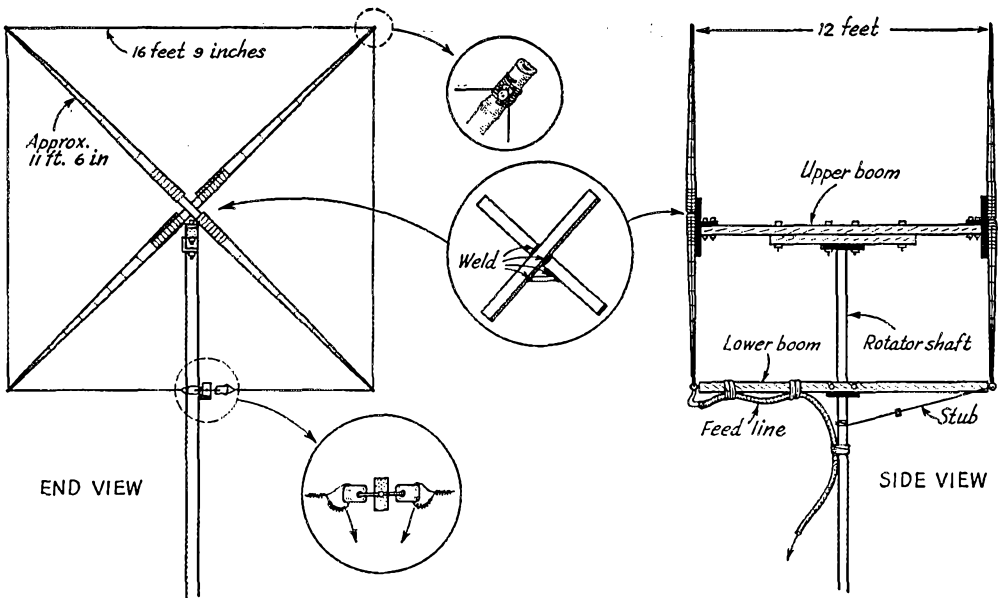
End and side views of 20-meter quad. Upper insert shows method of fastening antenna wire to support arms. Center insert shows construction of support-arm mounting bracket. Lower insert shows method of attaching feed line and stub to the center insulators. Two small egg insulators are used, fastened to end of lower boom as shown with a small nail.
